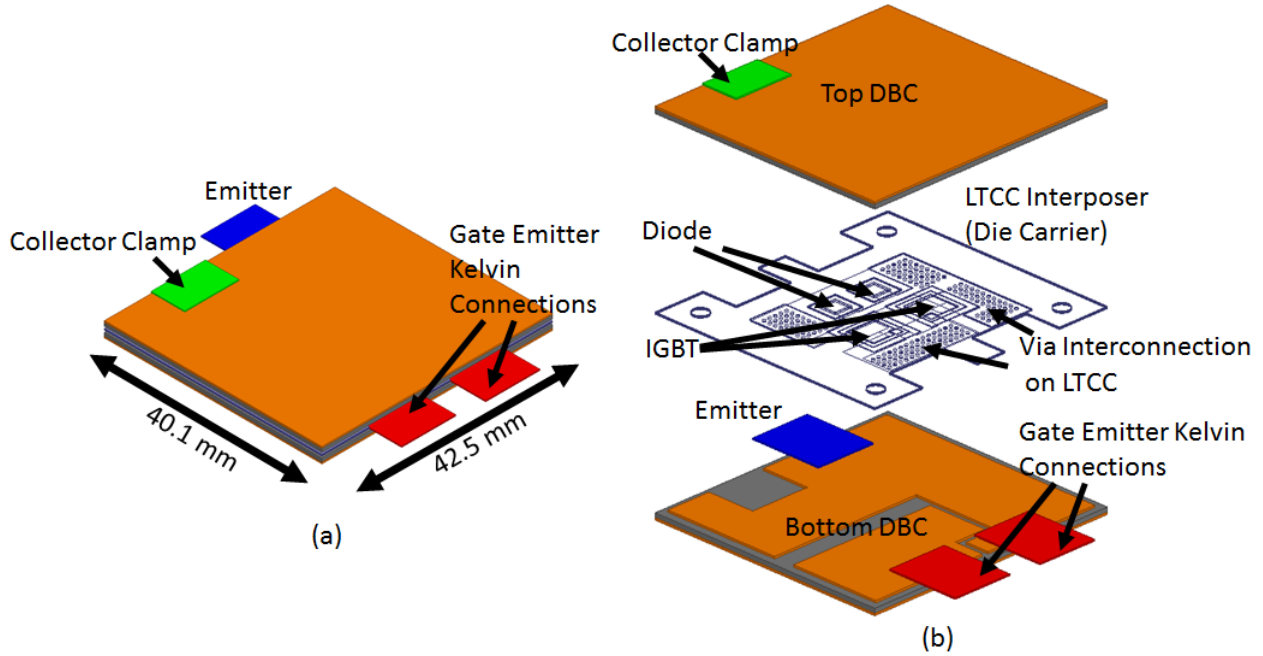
(a) 3-D rendition of the wire bondless power module, (b) exploded view of the wire bondless power module
